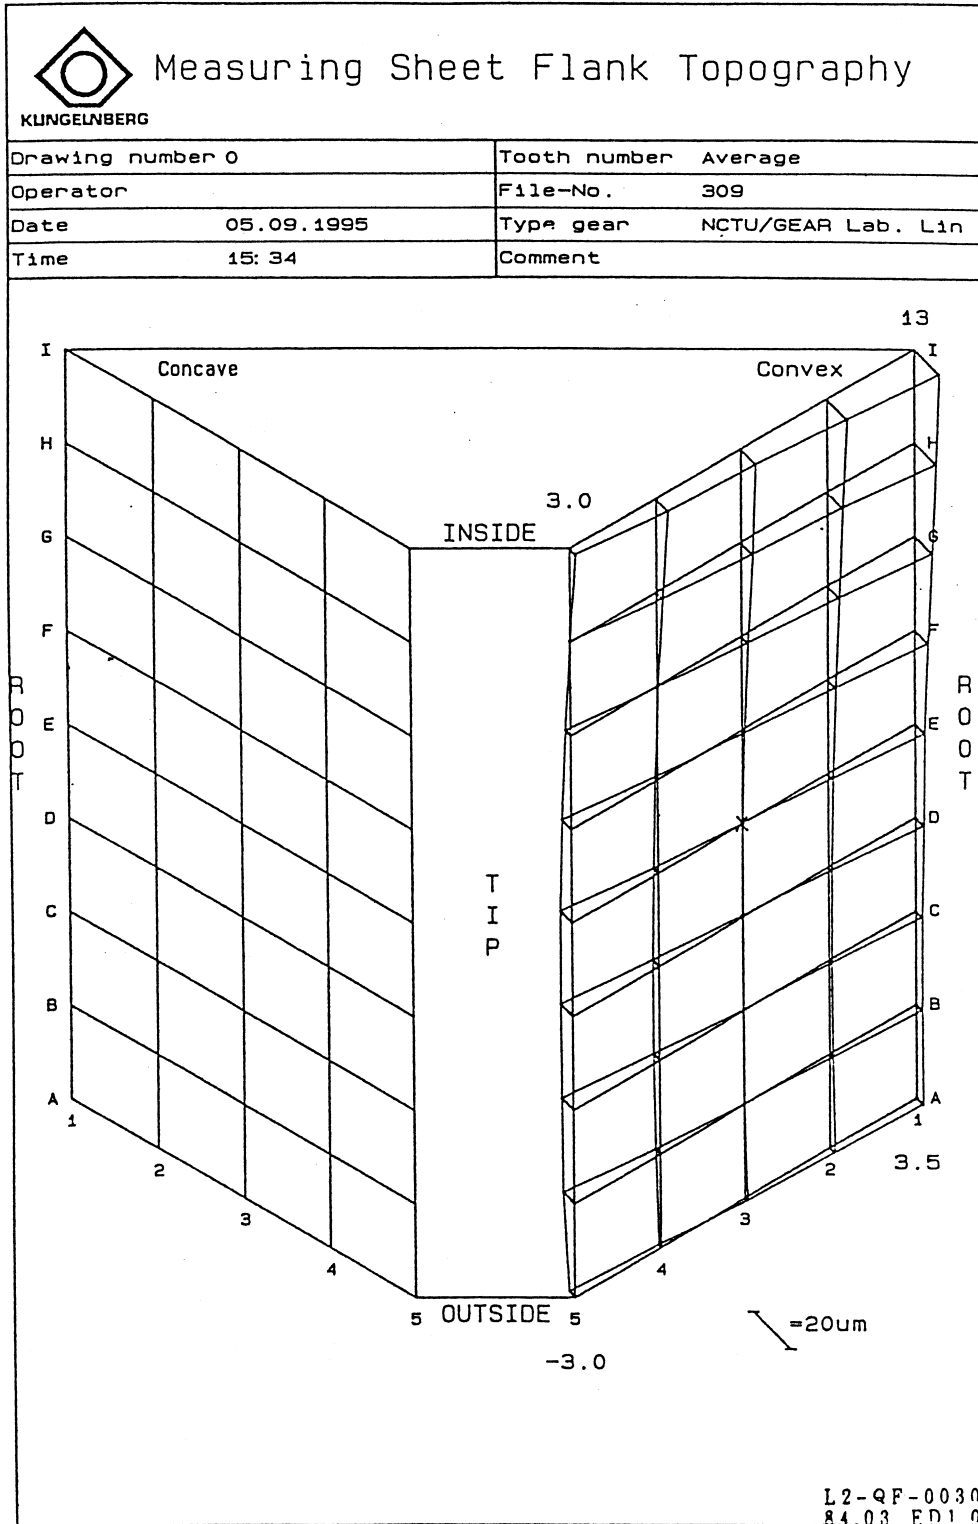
Pinion surface deviations on convex side cut by using corrective machine-tool settings.
